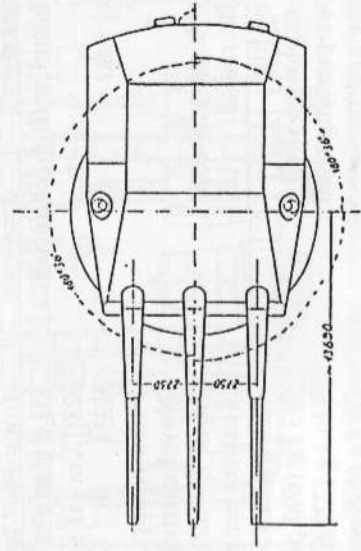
b. Dimension plan view of the gun turret at Austrått.
